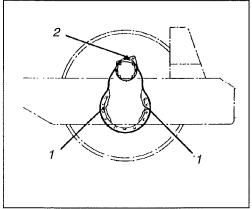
Level check - Funk torque hub 1 Level plug 2 Filler plug
